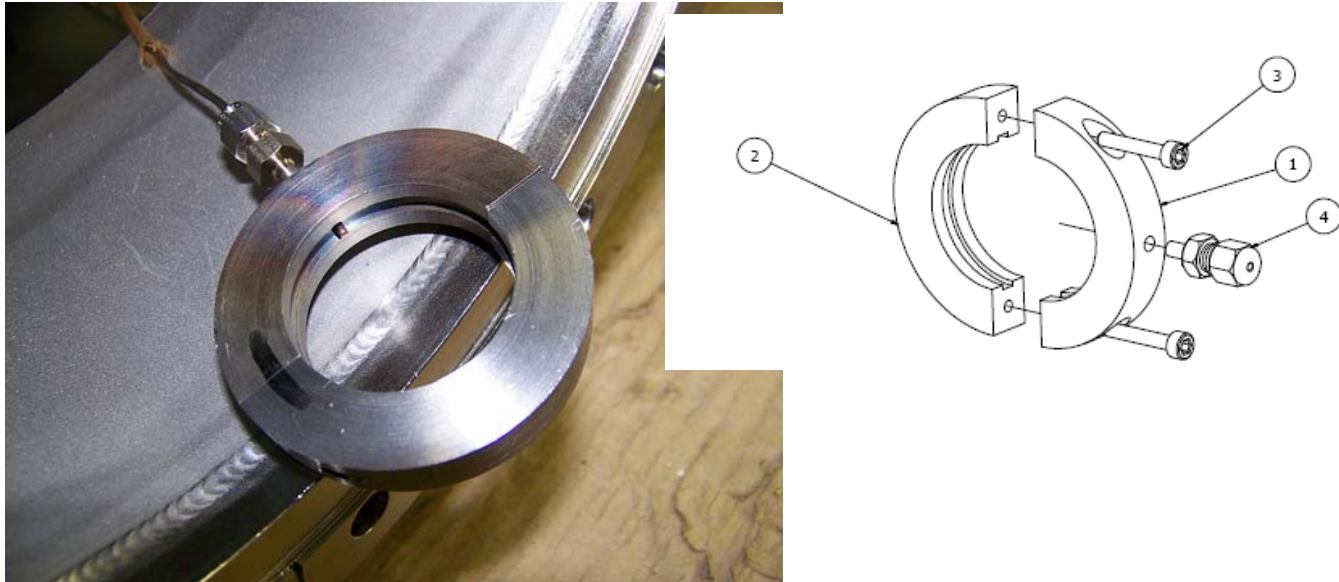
Hot ring 2 with the thermocouple, photo and exploded view.
